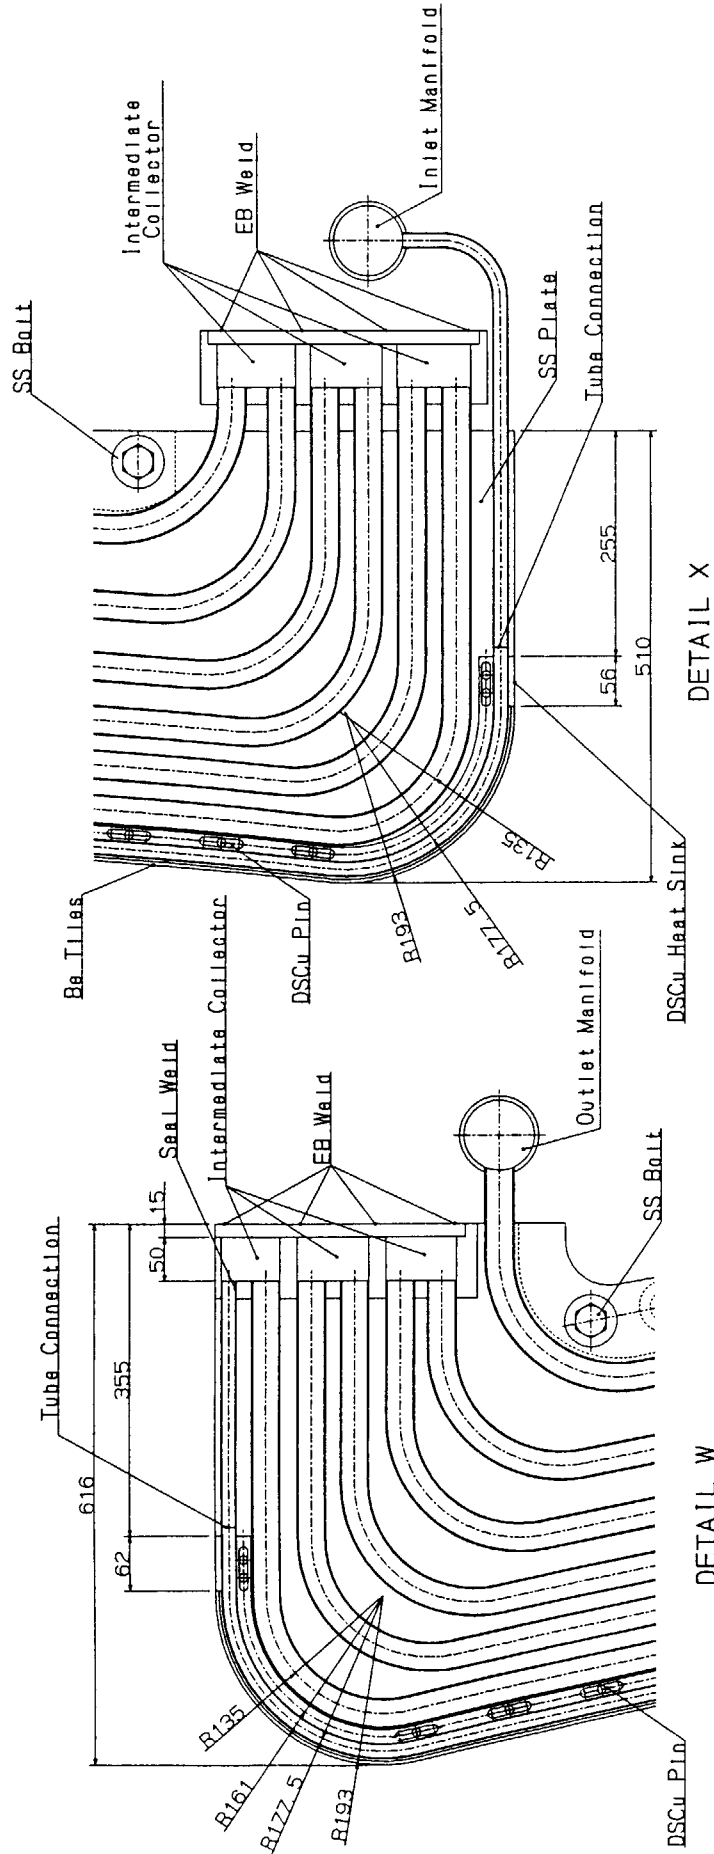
Detail Design of Limiter Module (Brazing & Bolt)
